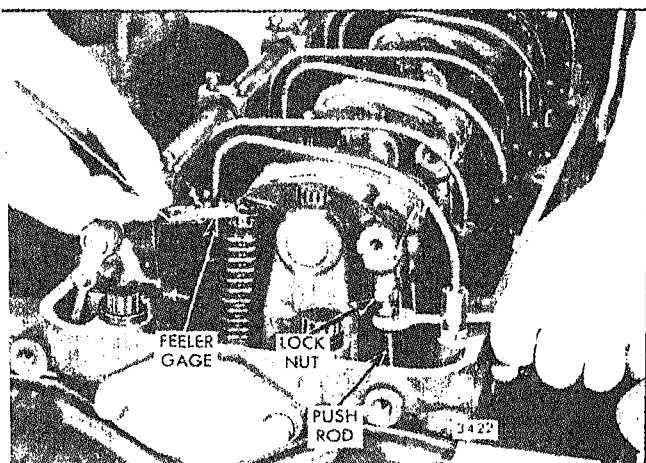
Adjusting Valve Clearance (Two-Valve Cylinder Head)
